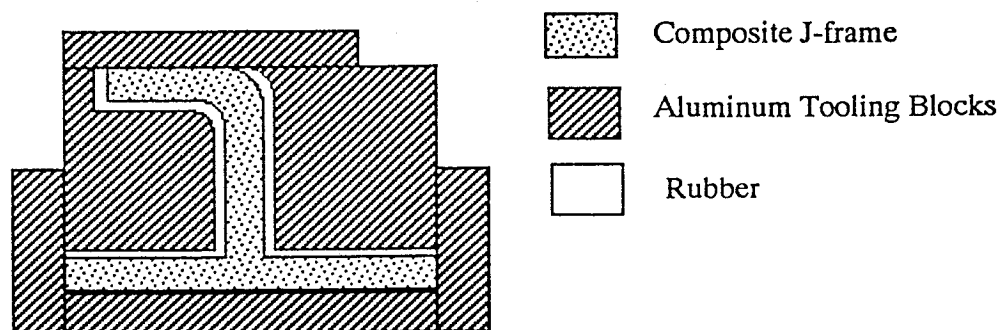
, Cross-Section Of The Tooling For Infusing The "J" Preform With Resin.
